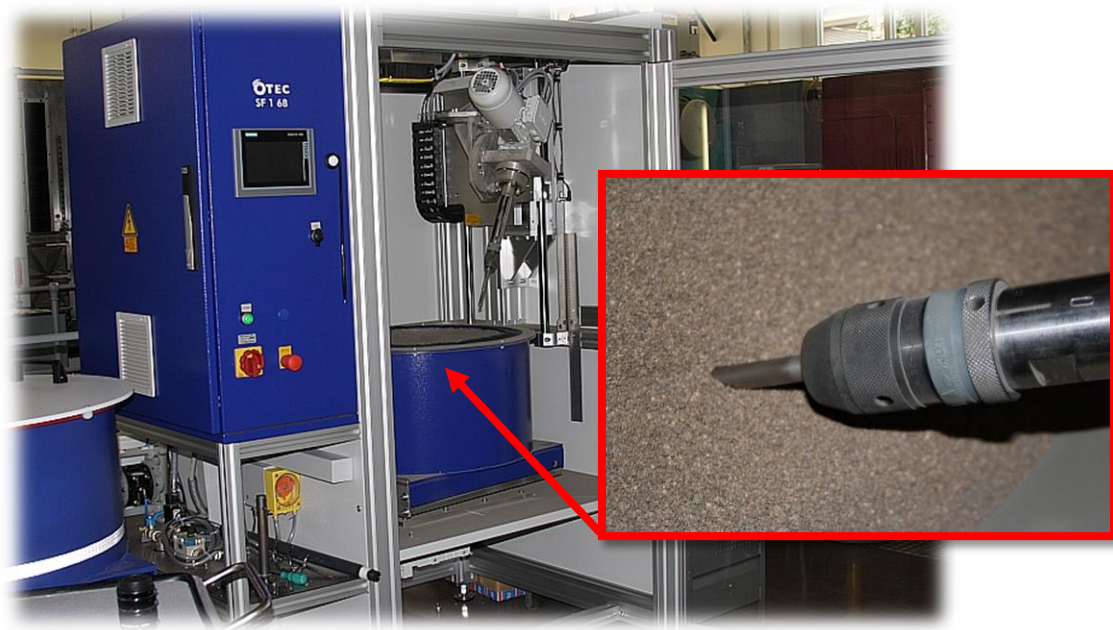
Processing setup for abrasive stream finishing of PCD cutting tools for cutting edge modification. The cutting tool is mounted in a custom made tool holder which is held in a keyless chuck, highlighted in the right hand side inset. By rotating both the tool holder and the drum containing the abrasive media of *SiC* and crushed walnut shells a highly uniform cutting edge radius with low cutting edge notchedness may be achieved.
